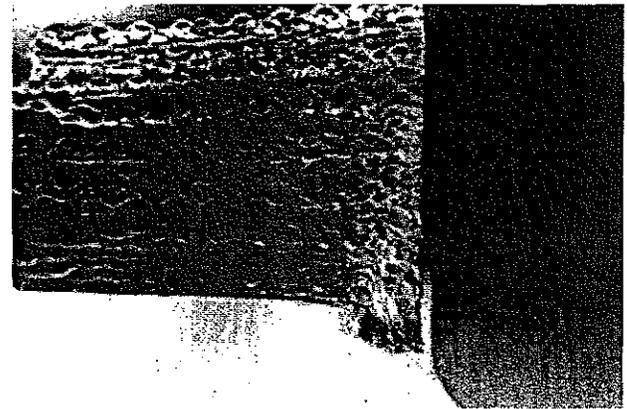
Side view of fracture surface of high velocity impact.
